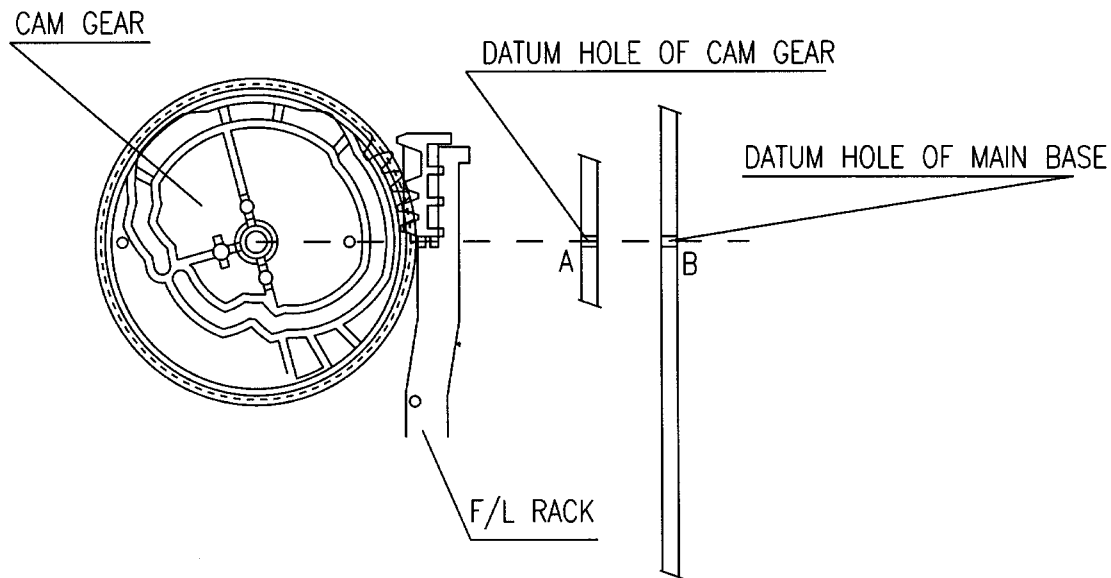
Mechanical Checks/Cam Gear and F/L Alignment
